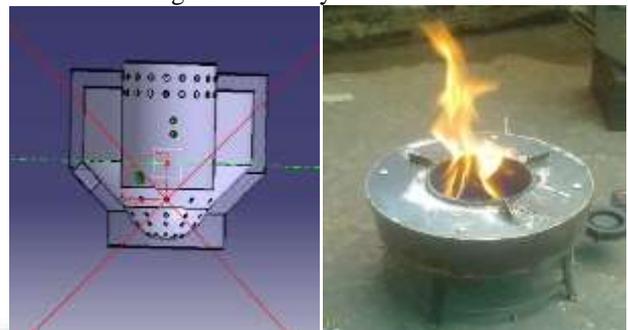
Cookstove assembly Fig-4.3: Fabricated cookstove
